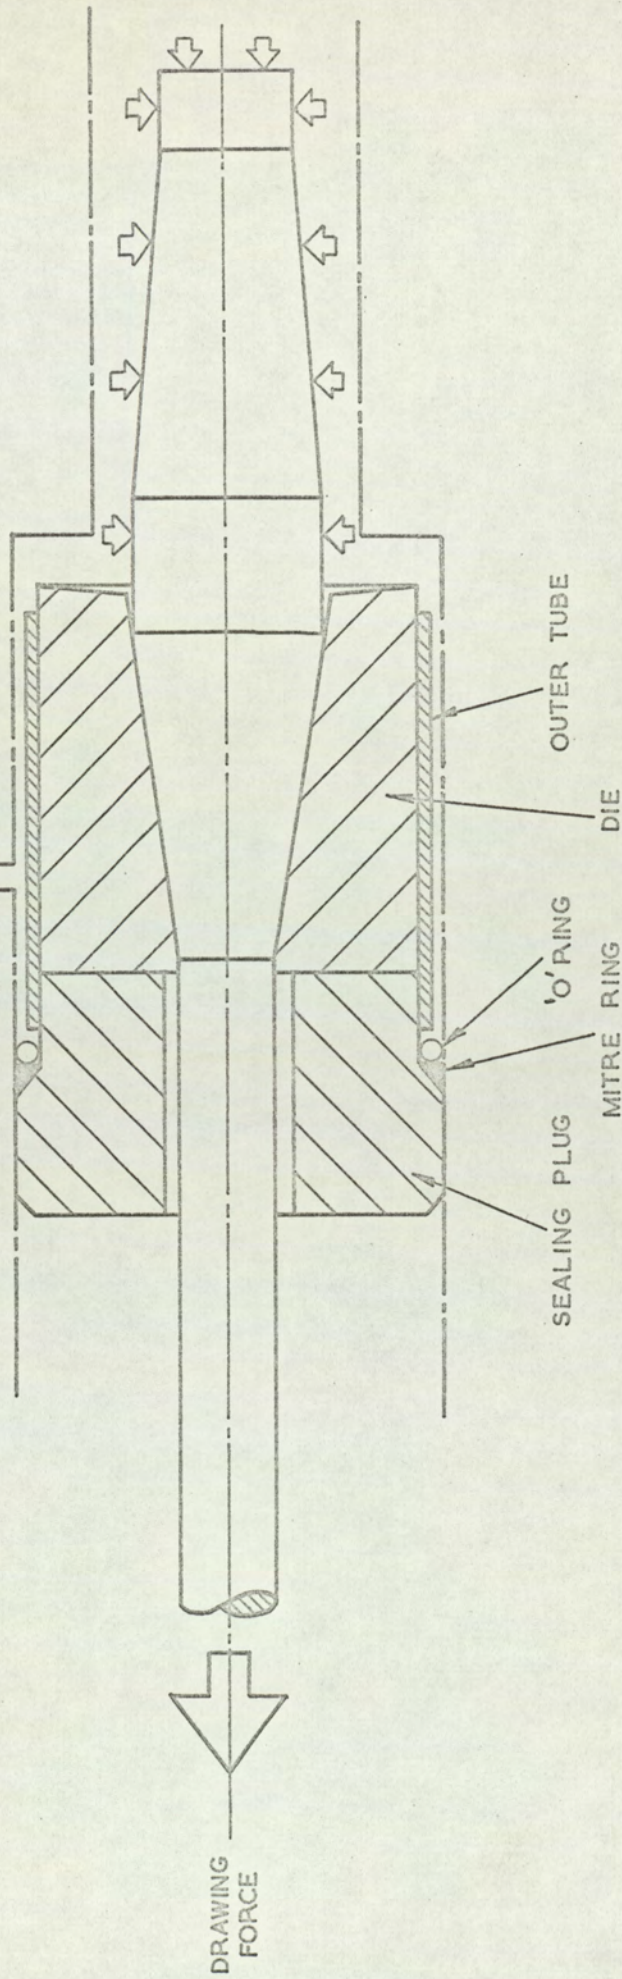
BILLET AND DIE ARRANGEMENT FOR PRODUCT AUGMENTED EXTRUSION
